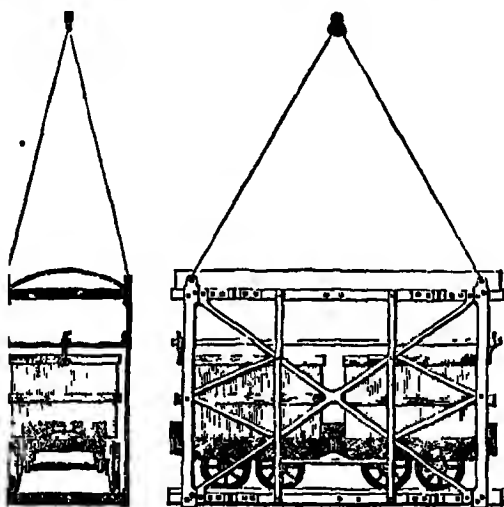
Single-deck iron cage, Newsham, for rolled iron girders.
